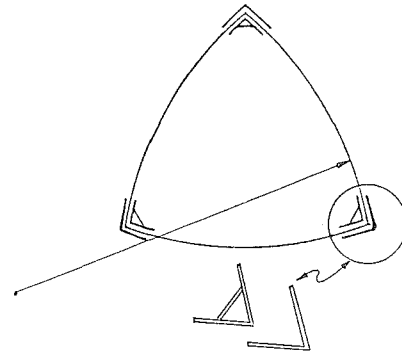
Specimen cross section - torsion box built of three curved stiffened composite laminated panels.
